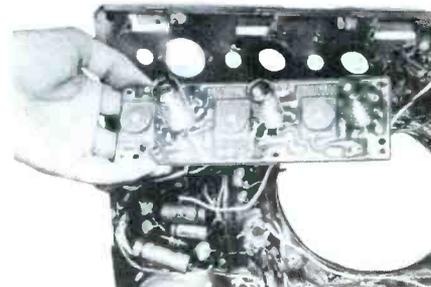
Printed Video IF Strip Employed in the RCA Model 17-S-6022 Television Receiver.
